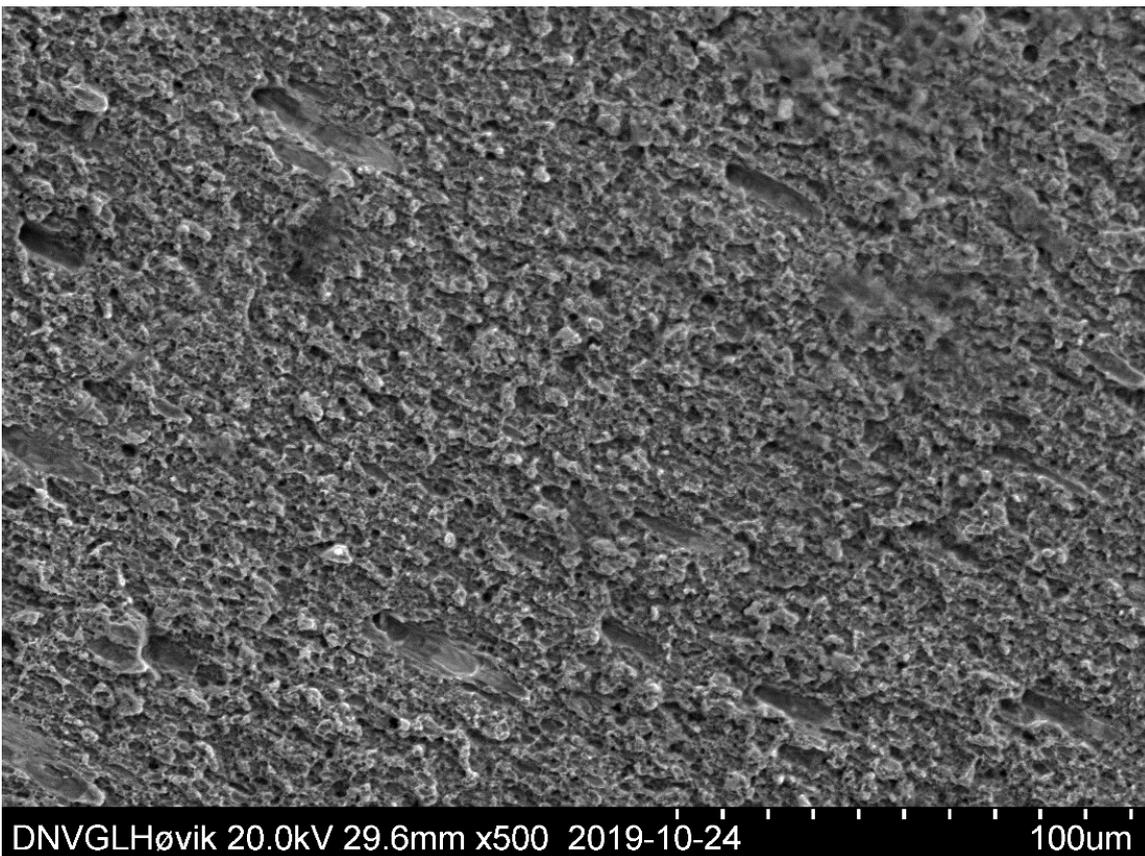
The fracture surface of the bolt in the previous figure, magnified 500 times. The dimples in the fracture surface are evidence of a ductile overload fracture. Photo: DNV GL/NSIA
